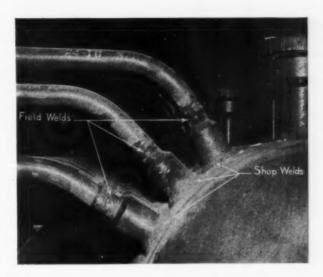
Means of reinforcing drums at tube entrance; the large tubes go through the drum plate and are welded inside and out
